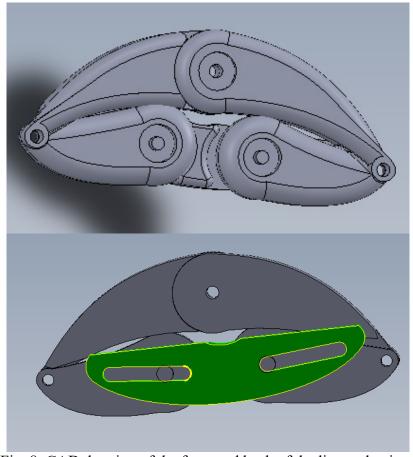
CAD drawing of the front and back of the lip mechanism.
